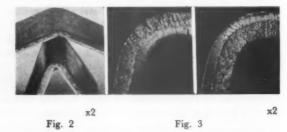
Strips blanked from the same piece of low-carbon steel sheet and bent, "burr" on inside of bend, over the same radius till cracks appear:
